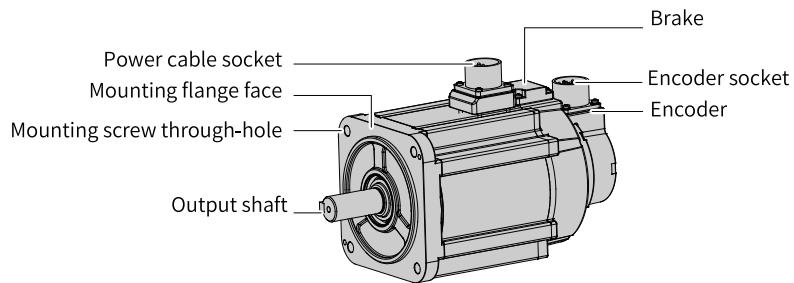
Components of servo motors in flange sizes 100/130/180
